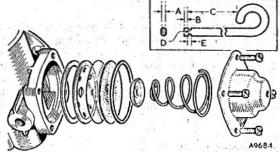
The delivery flow smoothing device. AUF 300 range pumps. (Inset enlarged) an assembly tool made from  $\frac{1}{8}$  in. (3 mm.) dia. (10 s.w.g.) iron wire. A, B, and  $E = \frac{1}{16}$  in. (1-6 mm.), C = 2 in. (50 mm.), D = 090 in. (2 mm.)
